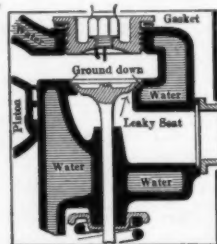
Section of a motor cylinder depicting the condition of the valve seat when the motor is old.
